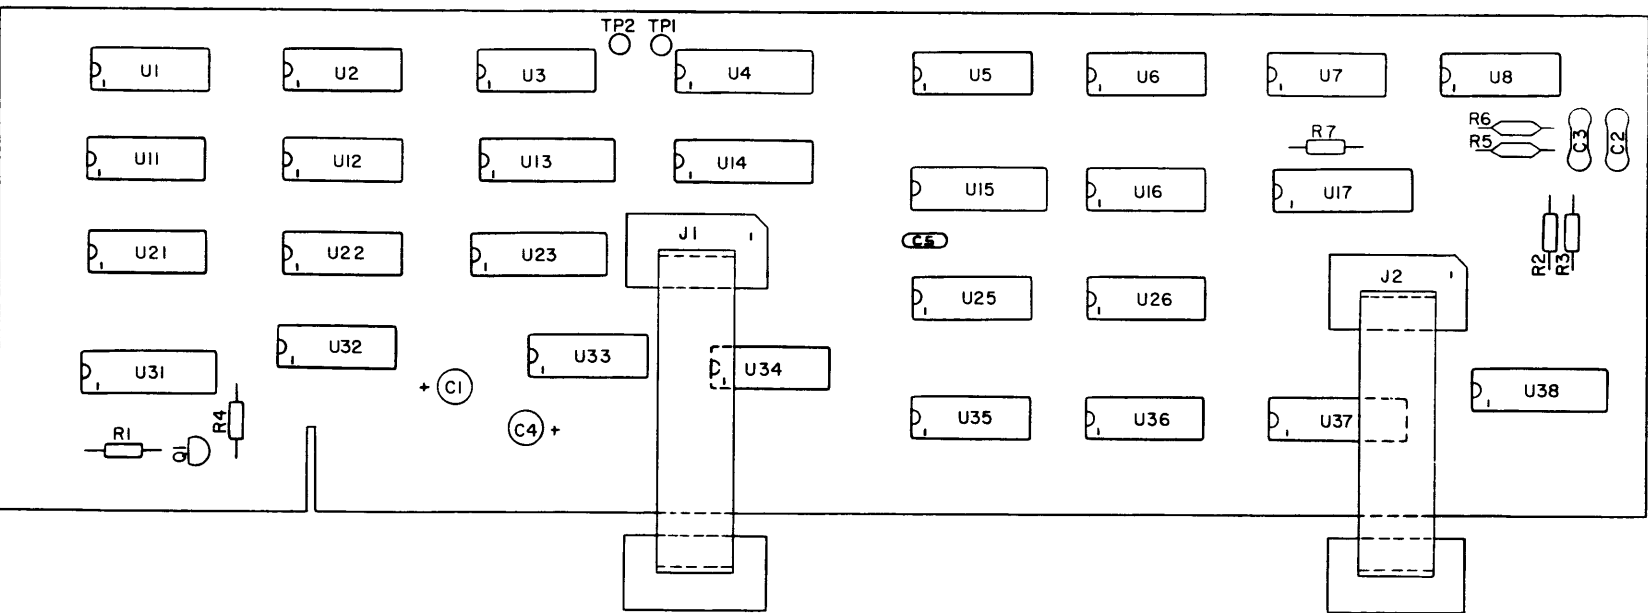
A10A2 Fast R- A/D Digital PCB Assembly
